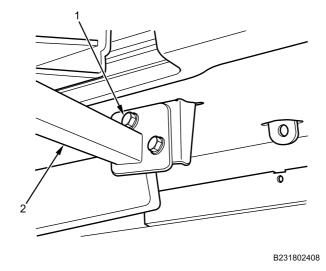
Right Side Gunner Platform Stand Mounting Bolts.
